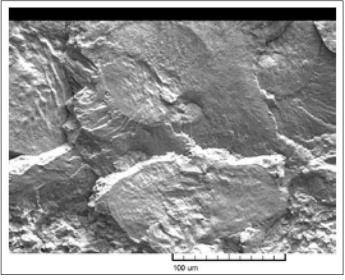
Opened fracture face (cf. Fig. 10a) revealing two cracks (similar to Fig. 9c), surrounded by the CFC structure (scanning electron microscope fractograph, backscattered electron mode).
